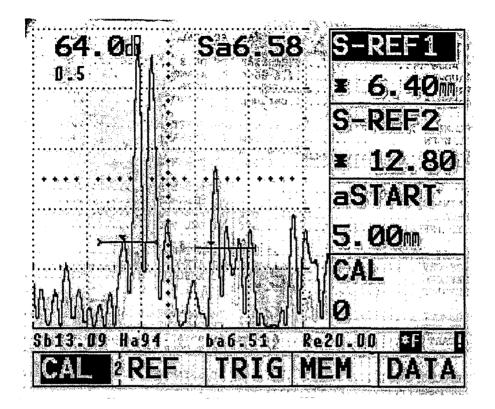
Ultrasonic echo pattern FM14AA1 Hot powder forged brake pad
